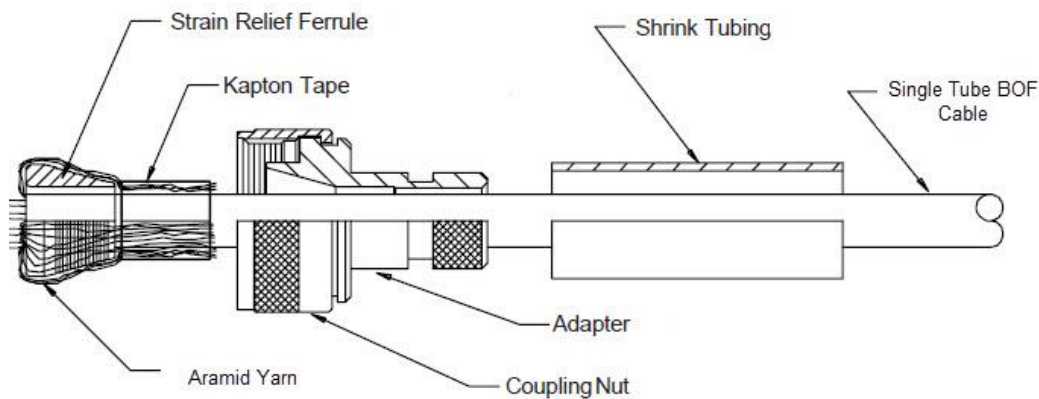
F4-1. Installation of adapter 1 onto single tube BOF cable.
